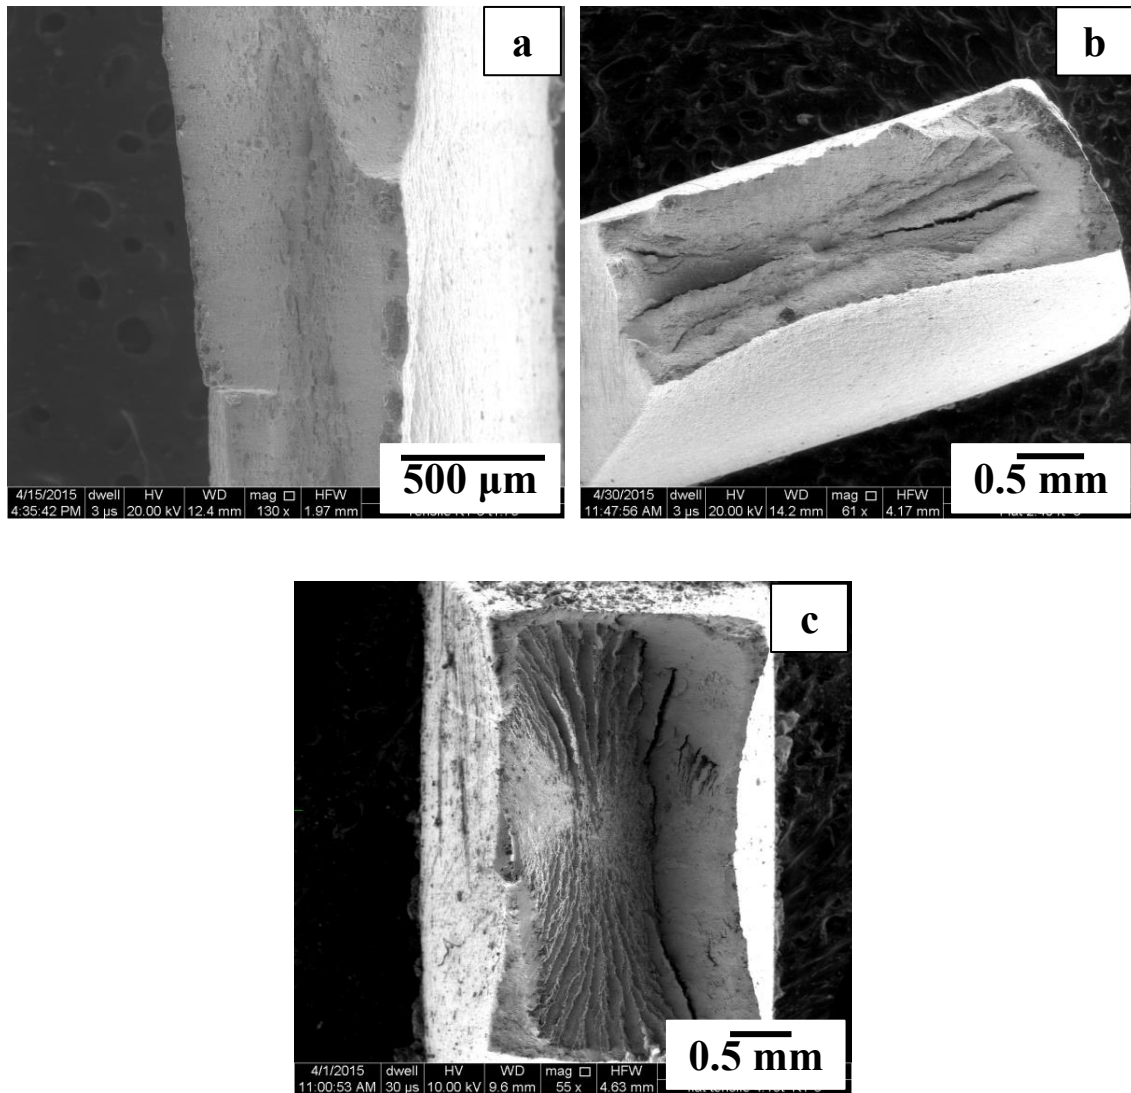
Overall view of fracture surfaces of flat tensile specimens of different thicknesses: (a) 1.75 mm, (b) 2.4 mm, and (c) 4.5 mm.
